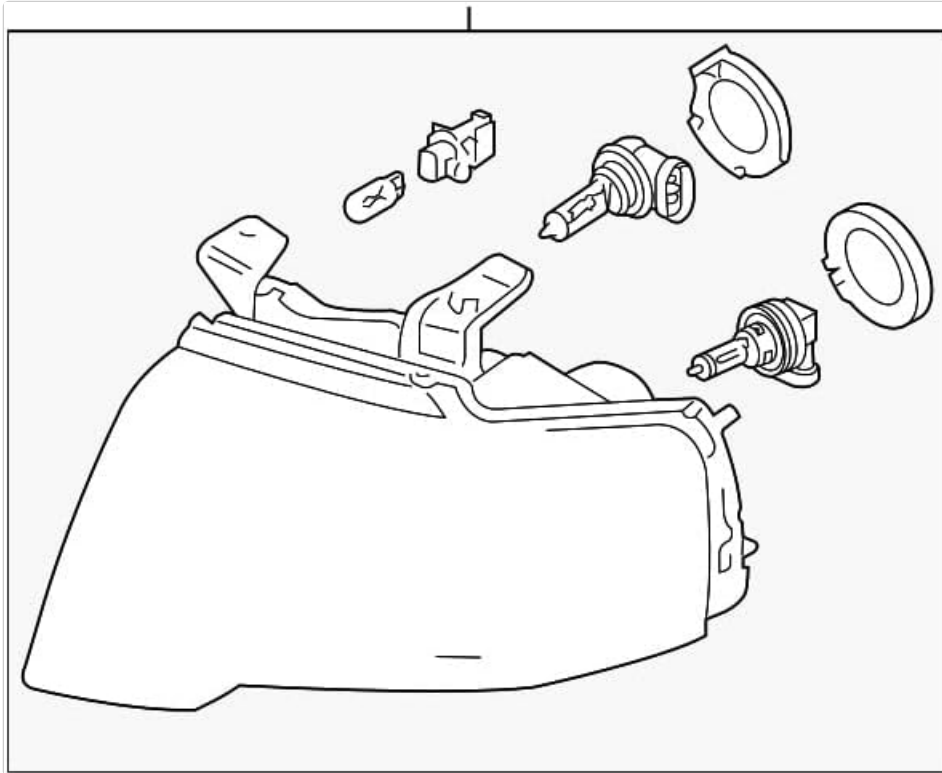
Exploded view diagram illustrating the various components of a headlamp assembly, including bulbs and mounting points. This diagram aids in understanding the assembly's structure for installation.
